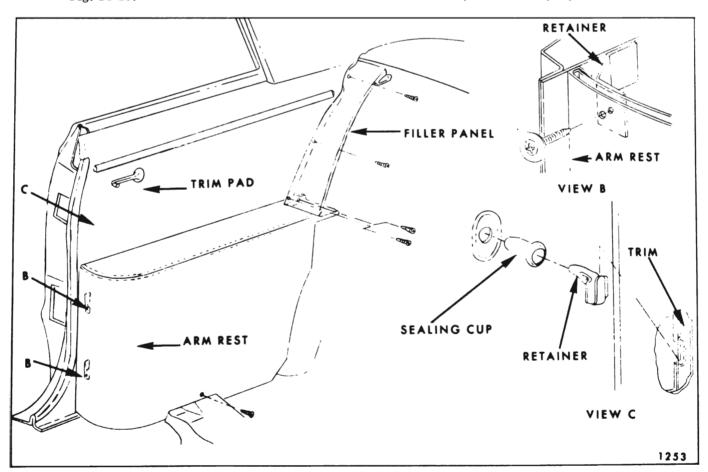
Rear Quarter Trim Assembly (Insert Type) with Floor Mounted Arm Rest
